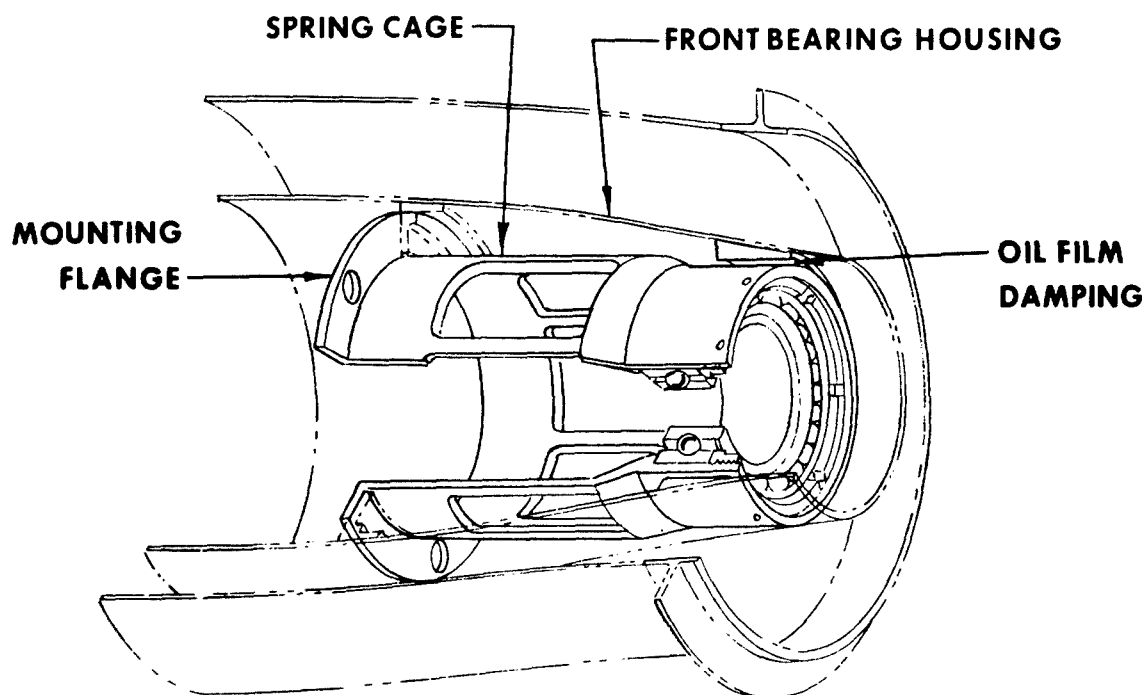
Typical Spring Cage-Type Shaft Support Bearing.
